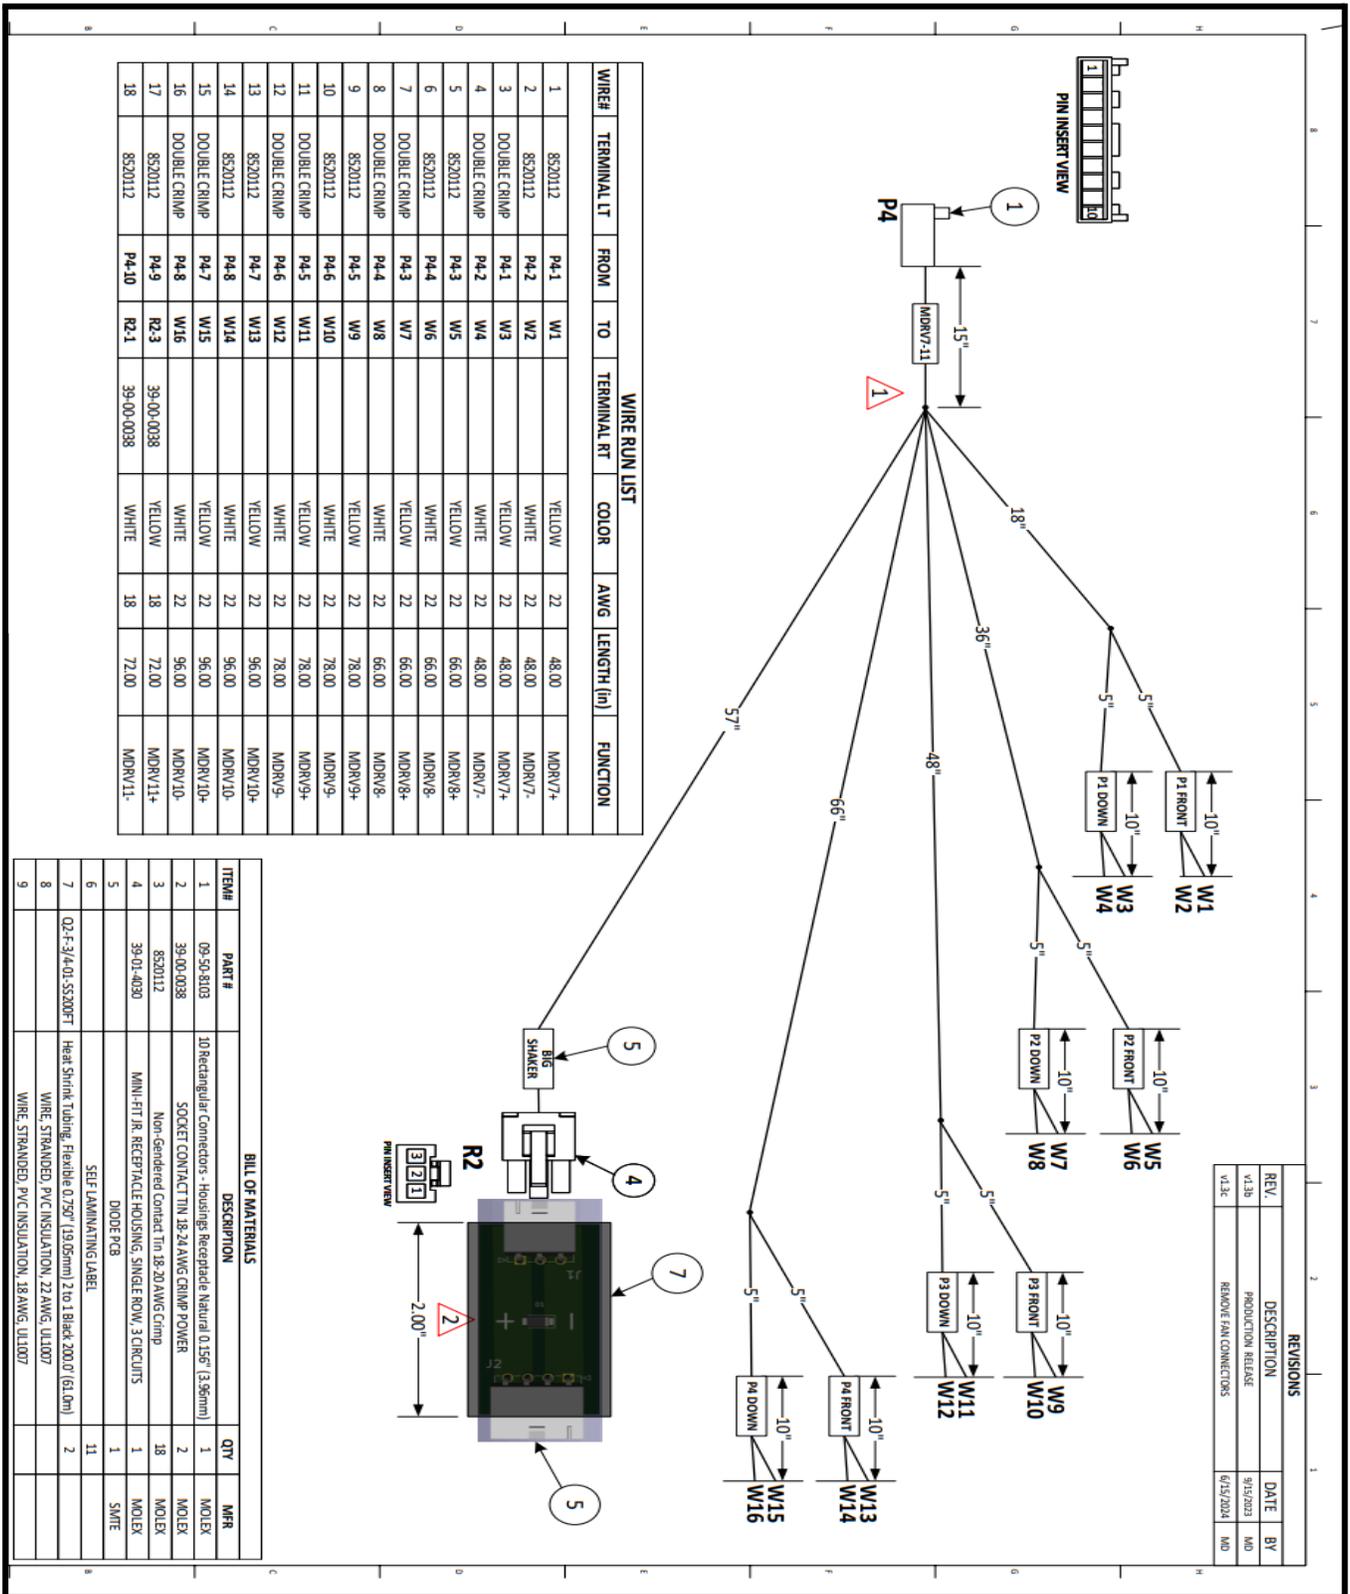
SHAKER MOTOR HARNESS DIAGRAM
